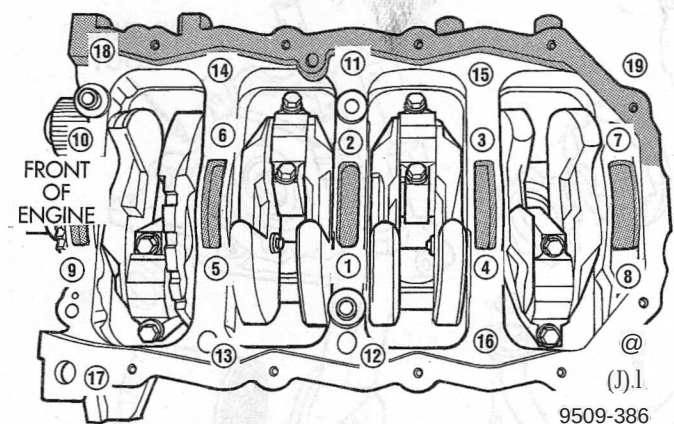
Main Bearing Caps/Bedplate Torque Sequence
